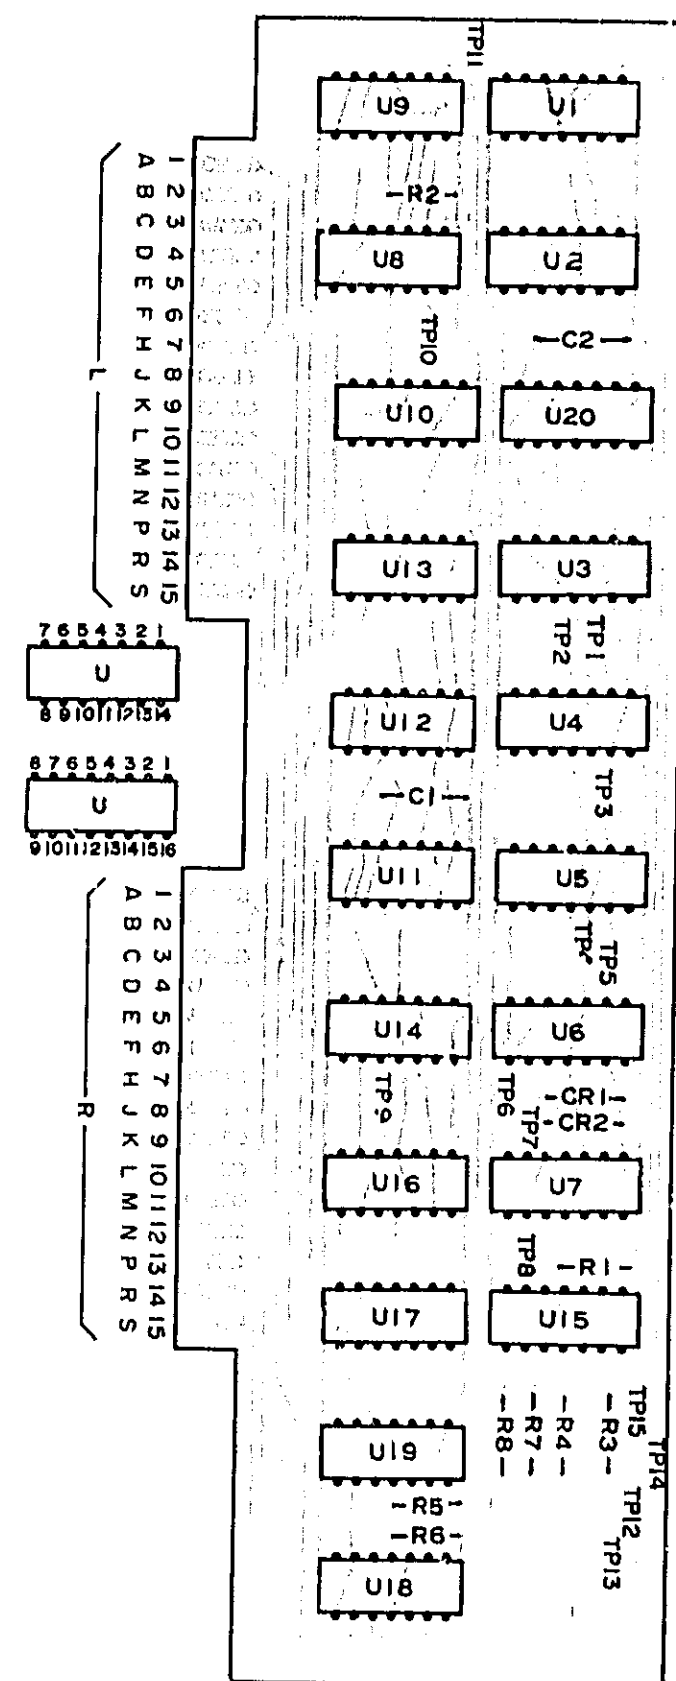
A15 Step Control Board Assembly Component Locations.
